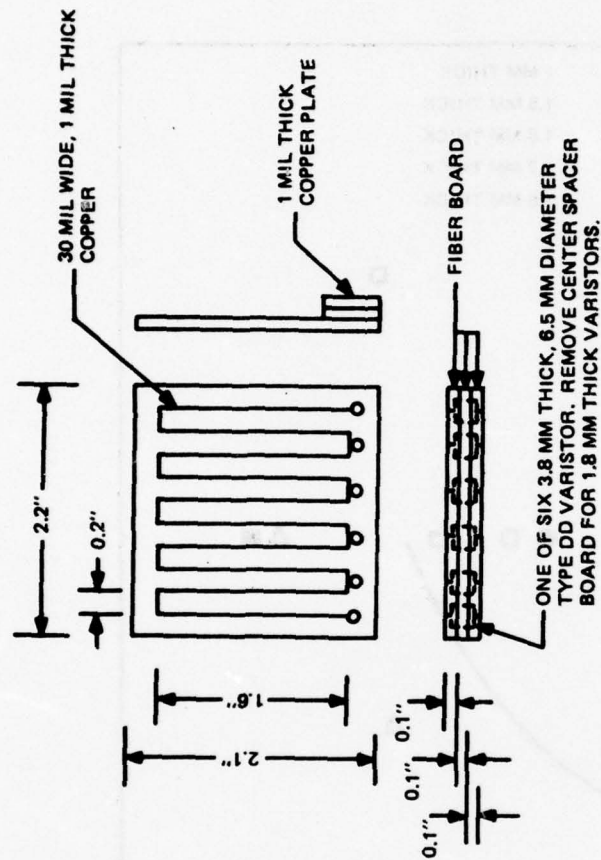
Engineering Assembly Drawing of the Prototype Five Stage Constant-K Varistor Filter.
